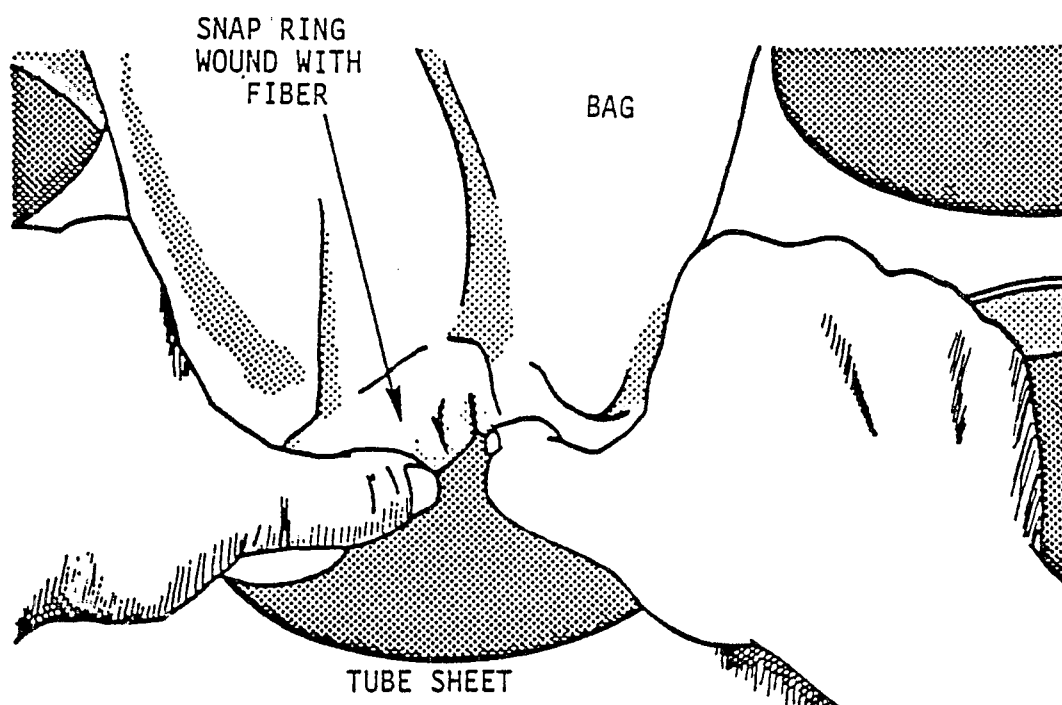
Proper method of installing bag in tube sheet with snap rings.
